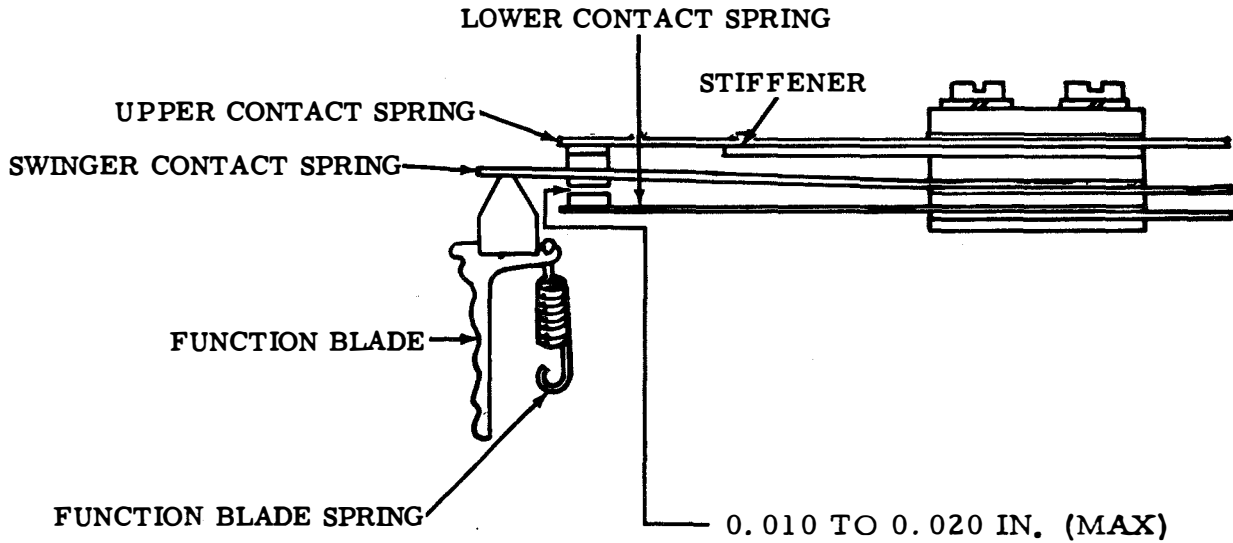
Normally-Closed Contact Gap - Right Side View
